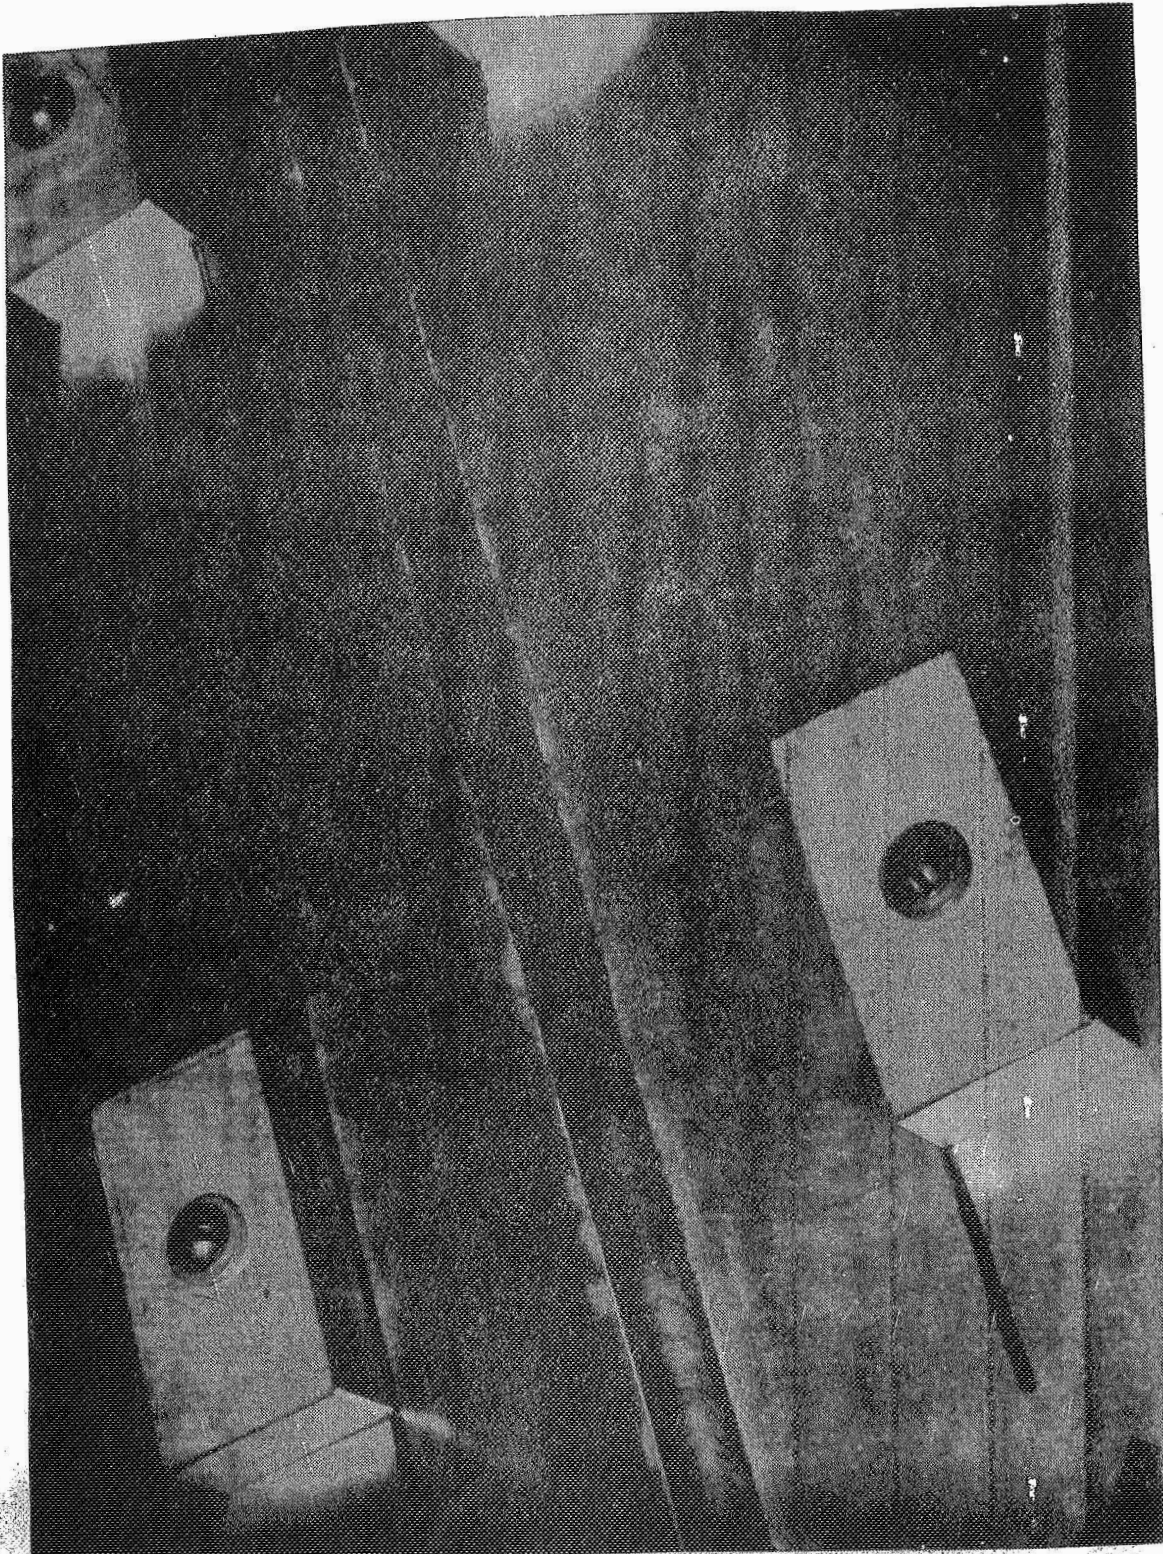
Weld bead on plate 1 near heat sink blocks.
